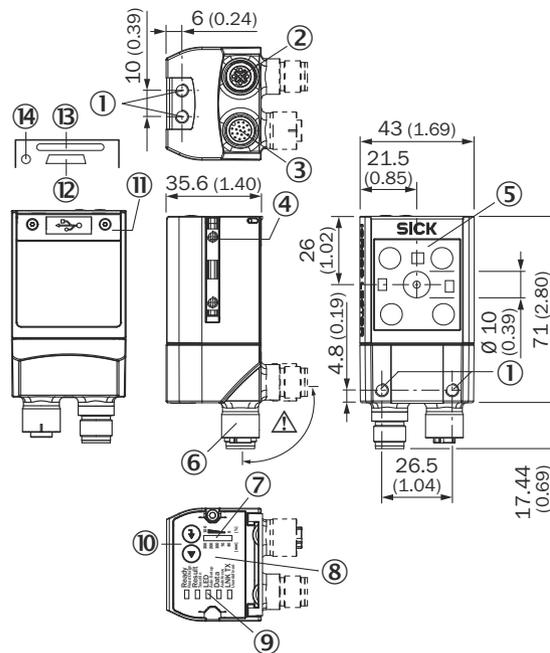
structure and device dimensions, unit: mm (inch), decimal separator: period
